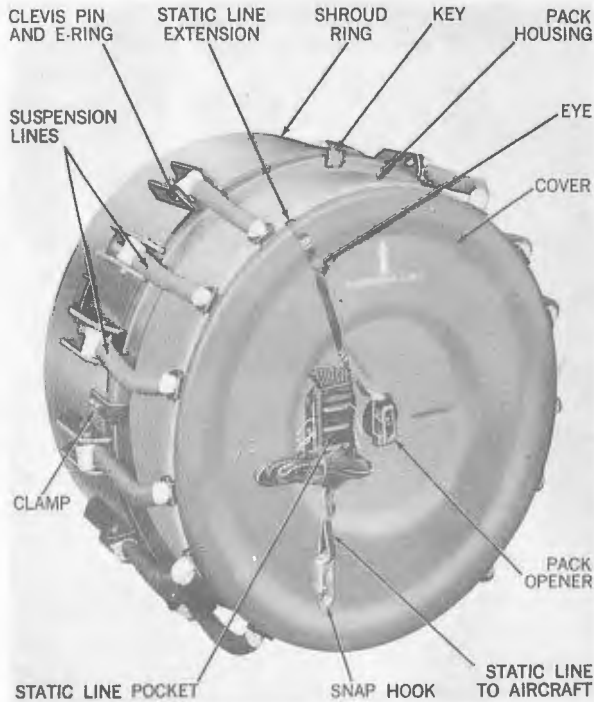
Parachute Pack Secured to Shroud Ring.
